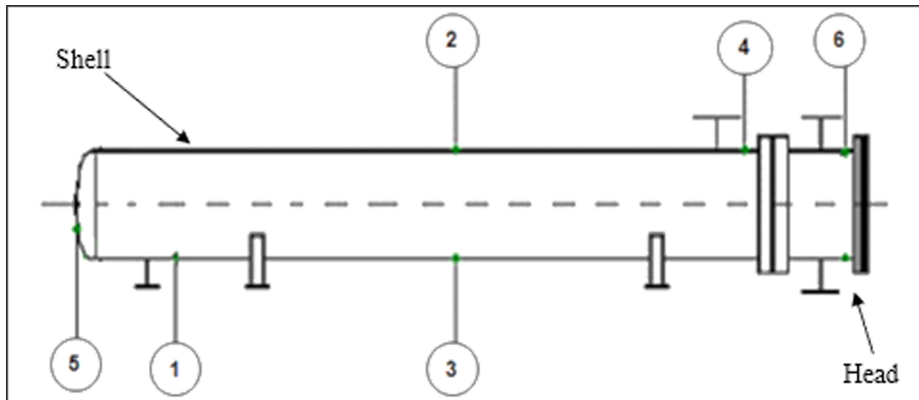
Indication of the places where the ultrasonic test was performed on the heat exchanger shell E-0004.
